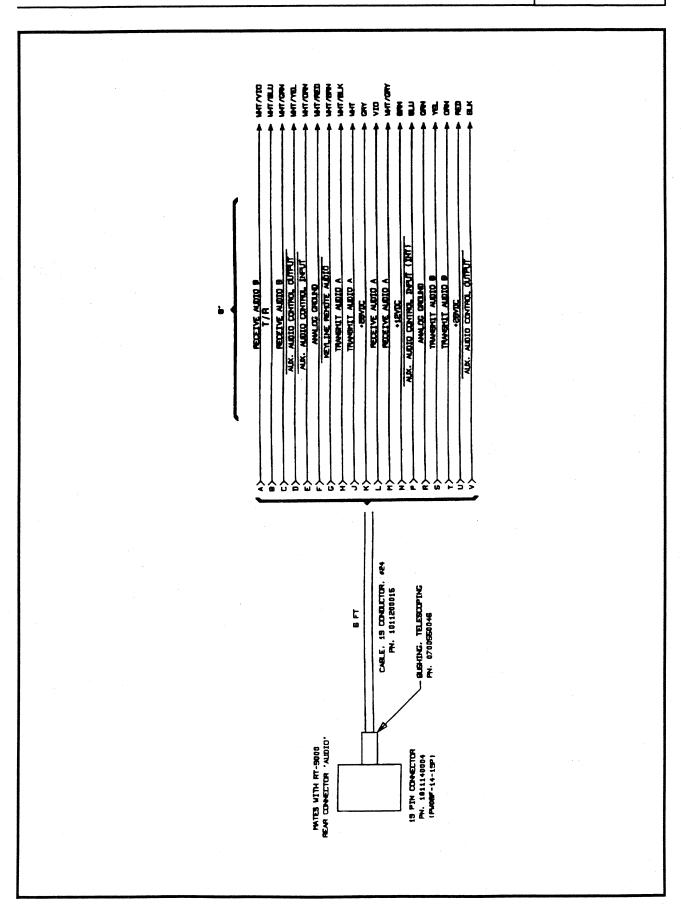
Cable Assembly, RT-9000 Audio Interface.
